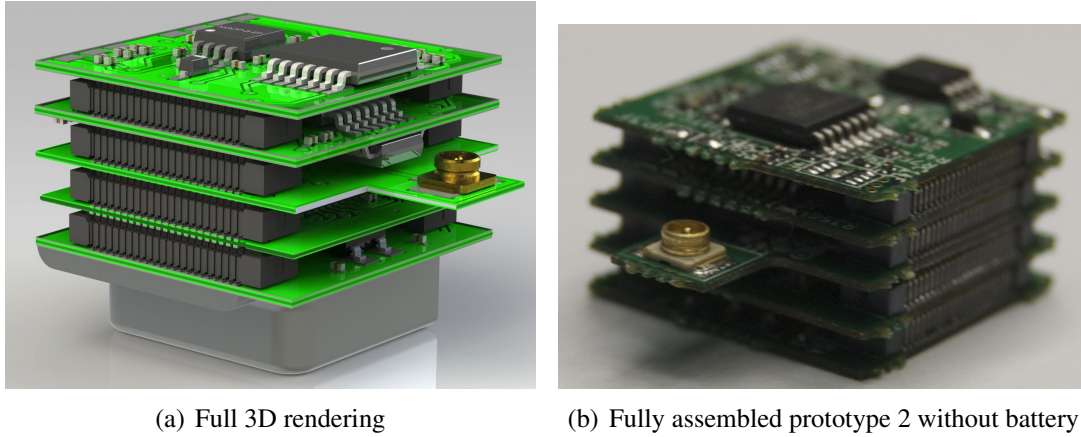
(a) Full 3D rendering of assembled wireless telemetry system with battery and lock-in method interface boards; (b) Fully assembled prototype 2 without battery attached.
